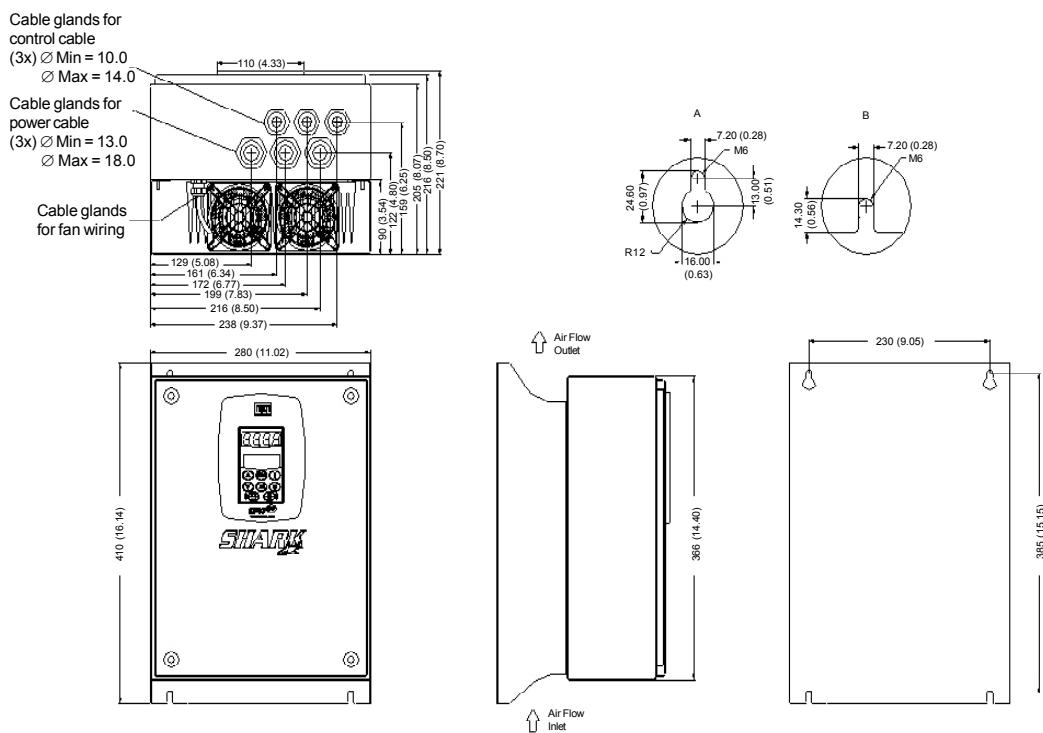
Mechanical data – Size 2, dimensions mm (in)
